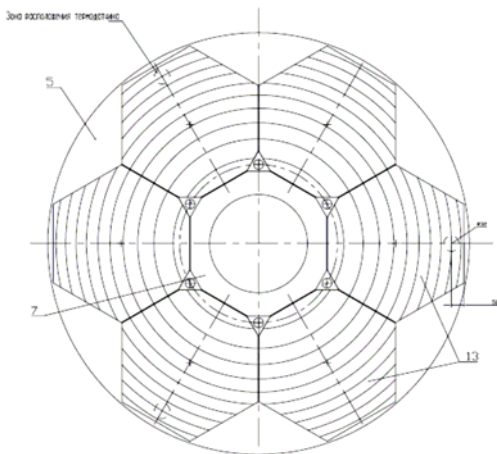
The technical drawing of the TUS segmented Fresnel mirror of 2 m² area ready for the production.
